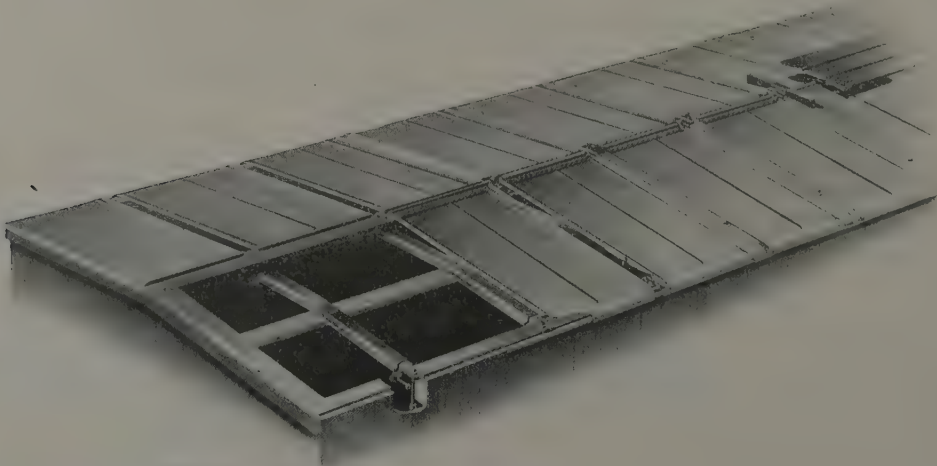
Hutchins All-Steel Steel Carline Roof Applied to Wooden Car. Hutchins Car Roofing Company.
